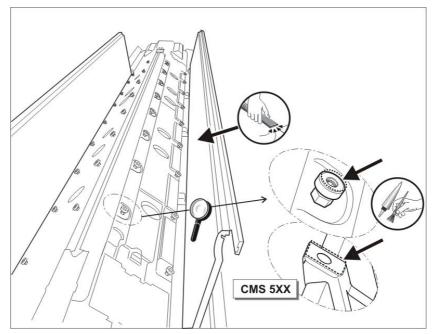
Greasing the needle bed supports/adjustment pieces
